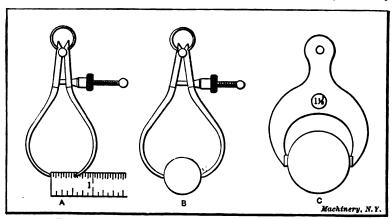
Setting Calipers by Scale—Setting by Gage—Fixed Gage
